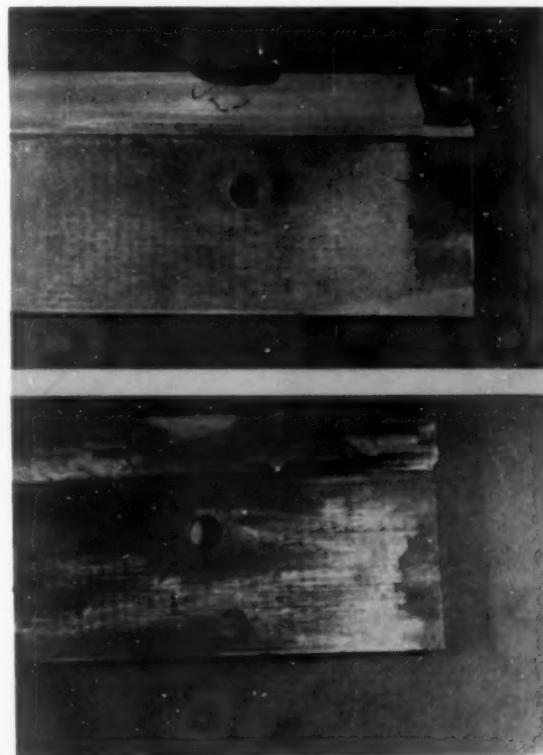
Views of a high-speed steel shear blade, before and after welding. The chipped blade was repaired with a high-carbon high-chrome rod.
